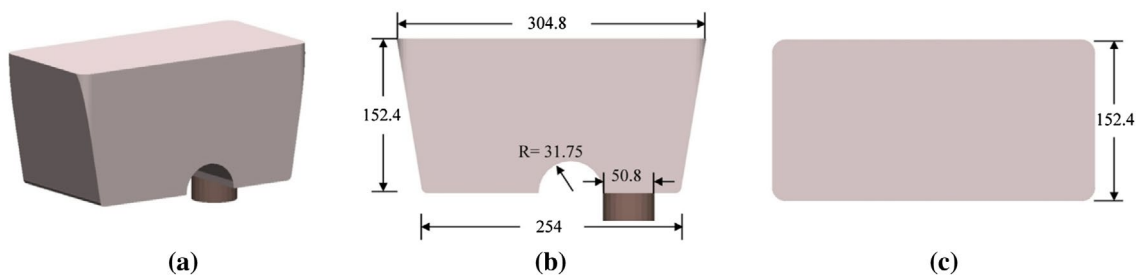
Geometry of the offset step pouring basin: (a) isometric view, (b) front view, and (c) top view. All dimensions in mm.
